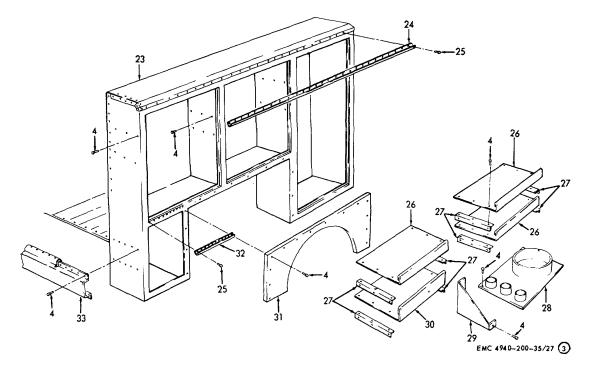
Shop set body, model SECM, disassembly and reassembly.
